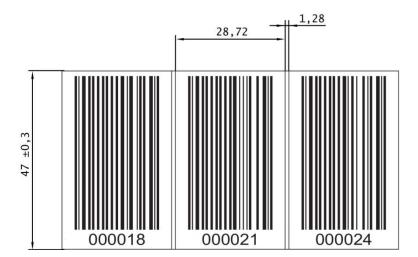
Dimension drawing barcode tape BCB G30 with 30 mm grid (all dimensions in mm)
